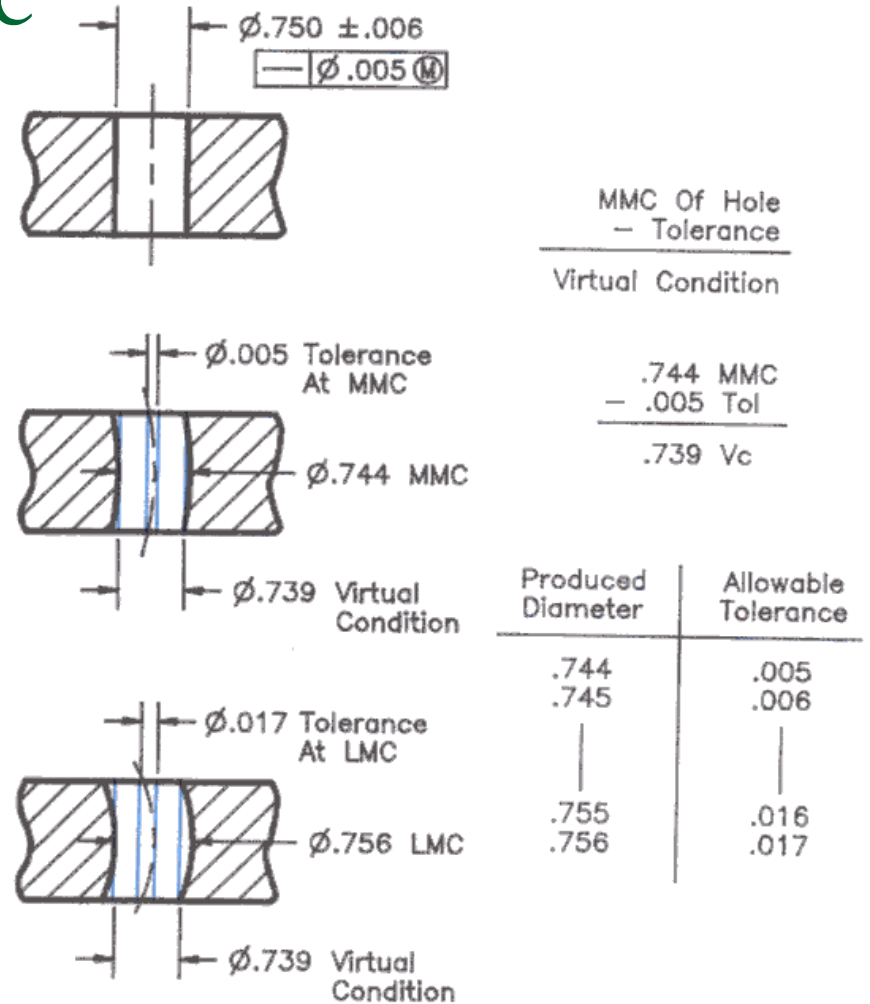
The virtual condition of a hole has a diameter smaller than the MMC diameter permitted by the size dimension.
